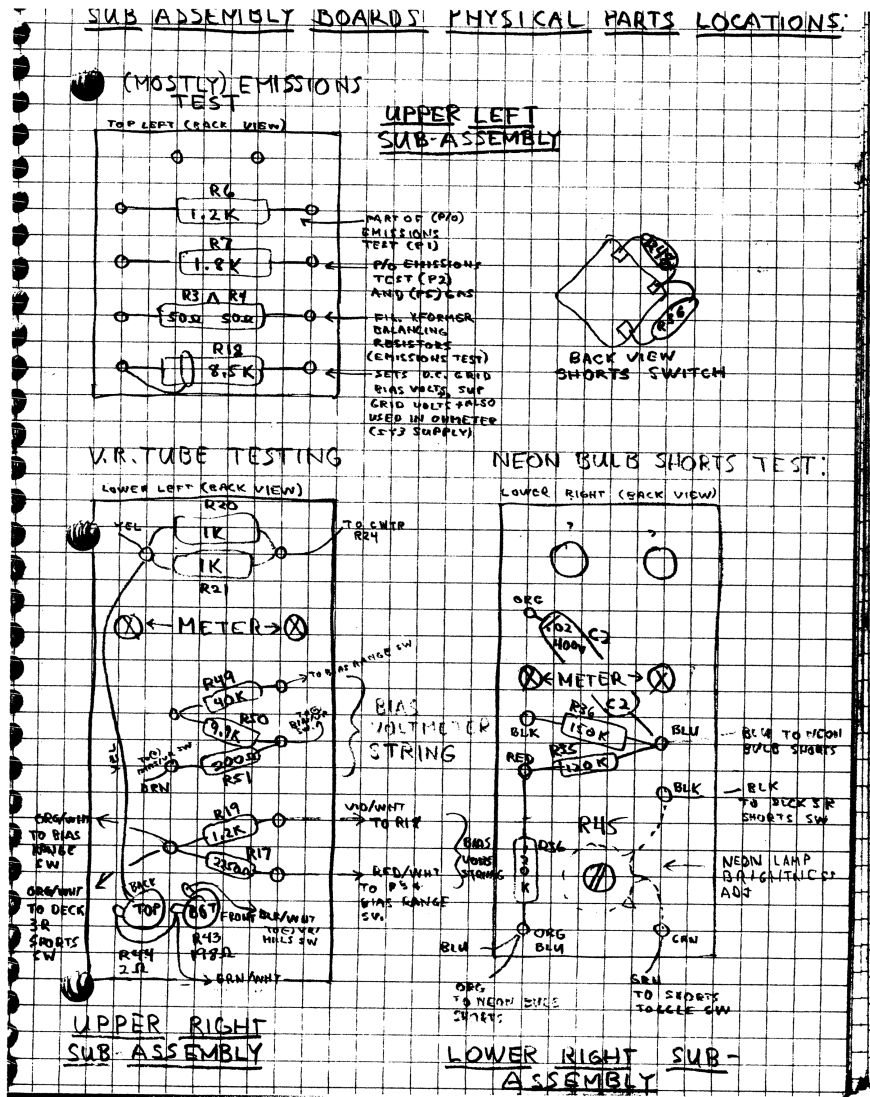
Subassembly Boards Physical Parts Locations, Part 2
